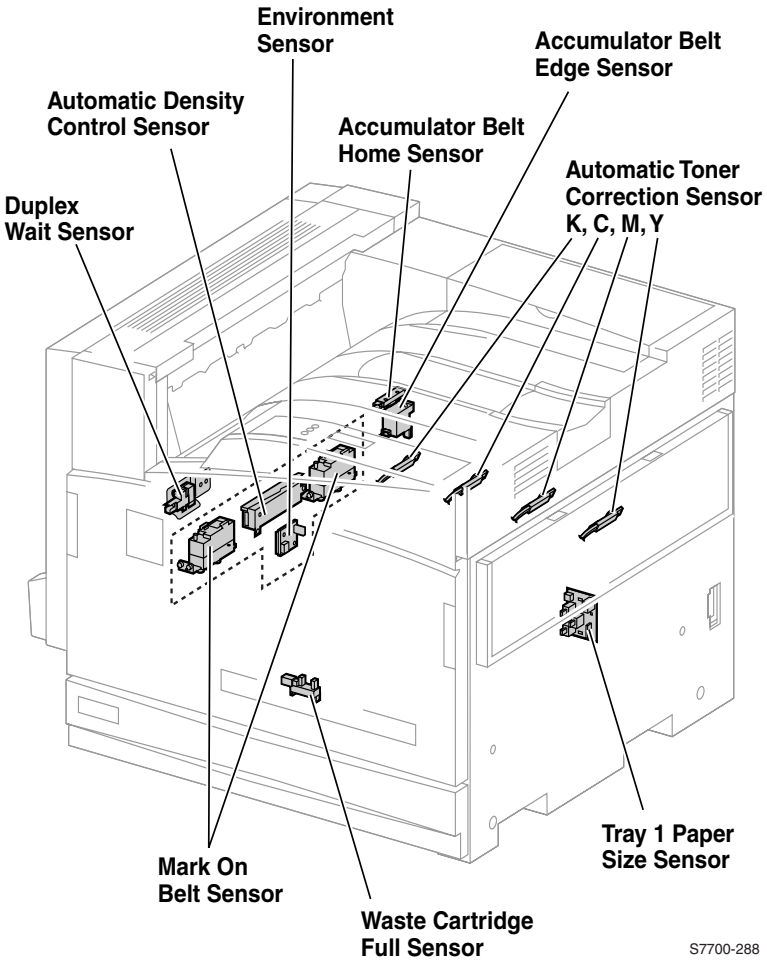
Print Engine Sensors and Switches (cont'd.)
